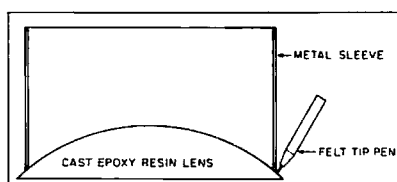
Marking the cast lens for edging. Note that the marking sleeve or cylinder must be perpendicular to this rear surface of the lens.
